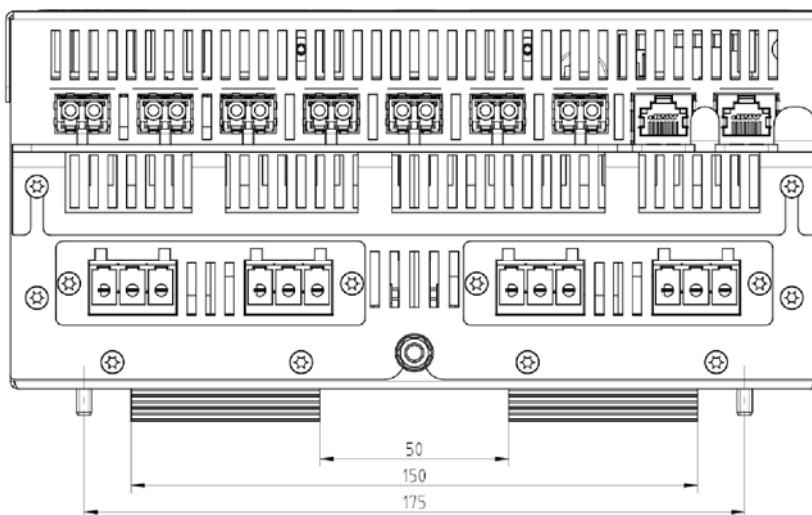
Dimension drawing IE Switch X302-7EEC - from above
